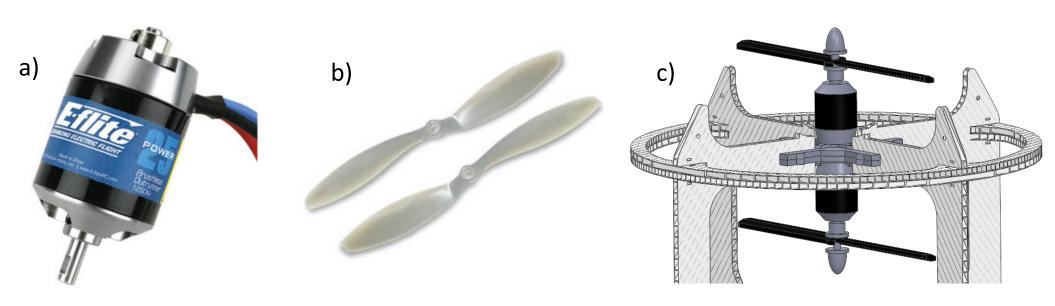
a) Actual motors used in the IPASS, b) Actual propellers used in the IPASS c) CAD model showing the mounting of the propulsion
